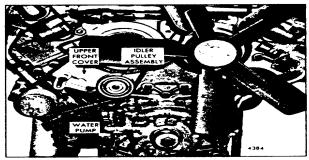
Typical Fresh Water Pump Idler Pulley
